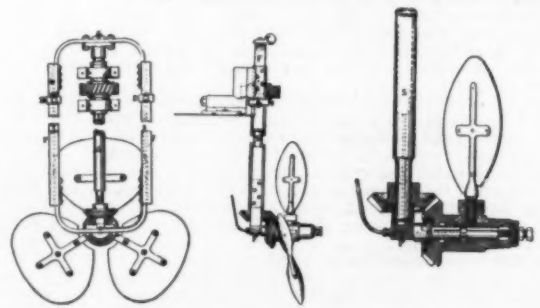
DETAILS OF THE SCREW AND ARRANGEMENT OF THE PROPELLER.
